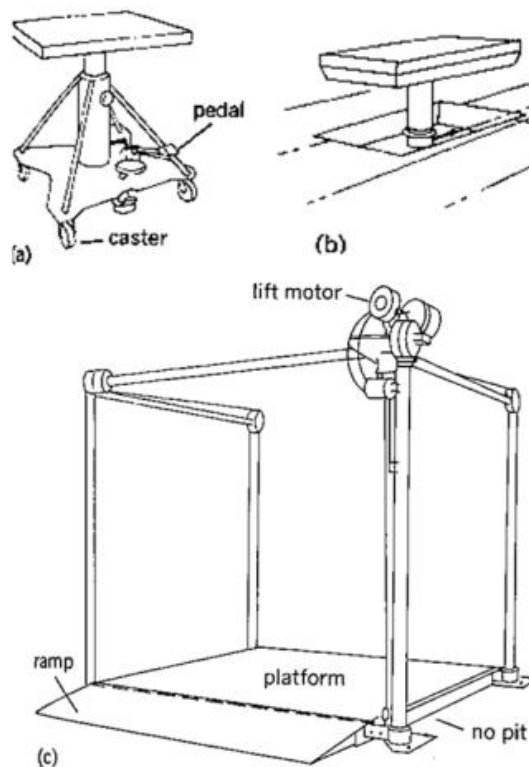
Examples of industrial lifts. (a) Hydraulic elevating work table. (b) Hydraulic lift floor leveler. (c) Motor-driven floor leveler.
